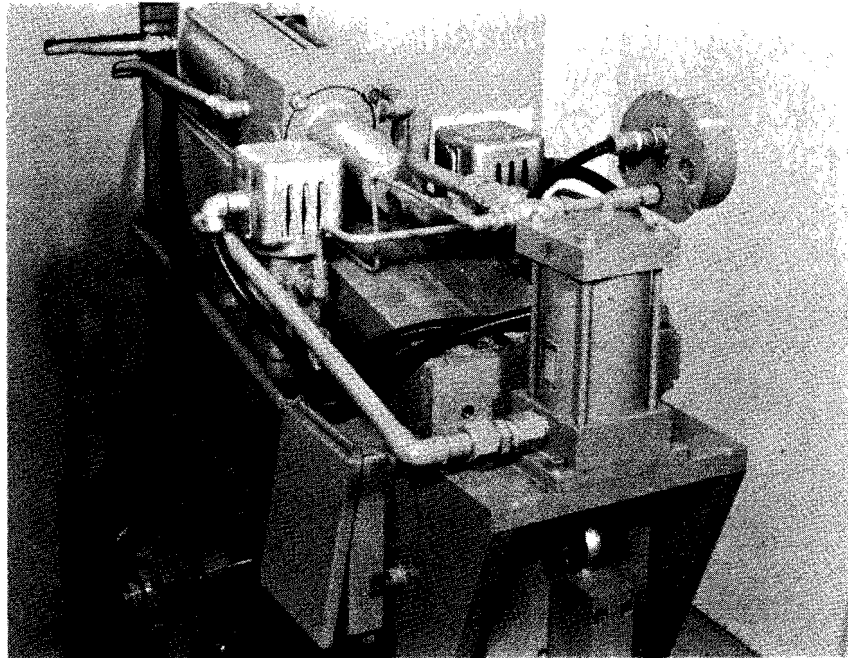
Air-Hydraulic Force System Installed on Welding Machine
